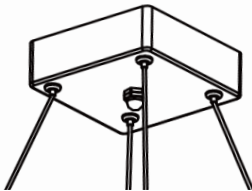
Position and center the canopy under rod extender, secure canopy by tighten locking nut onto rod extender
